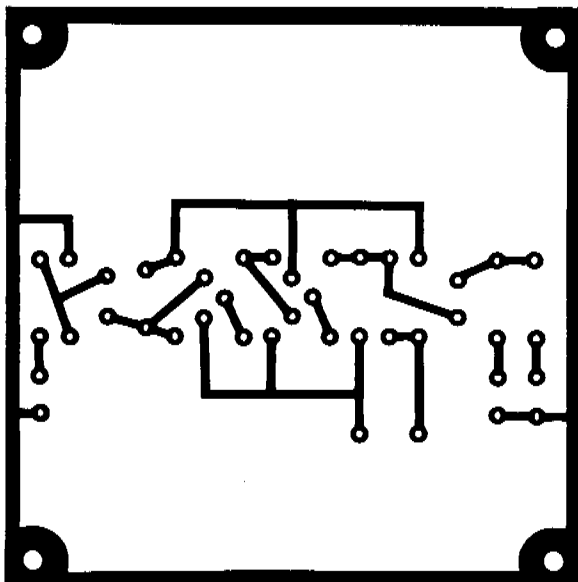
(c) Circuit board foil pattern for the center channel board.
